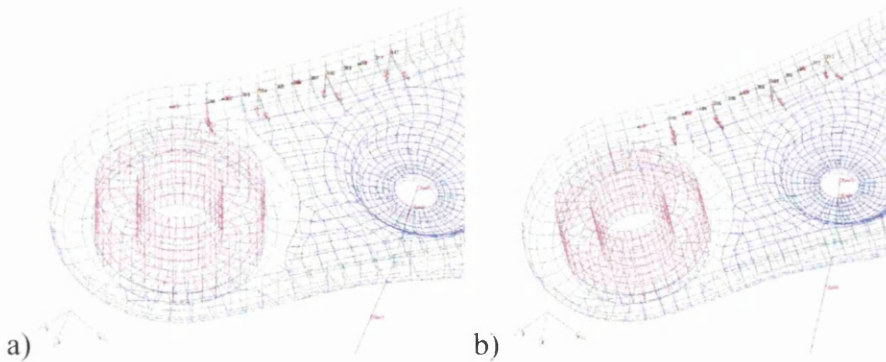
Local Coordinate System for Weld Root Location a) Full-Length Triangular Weld, b) Cut-Length Triangular Weld
